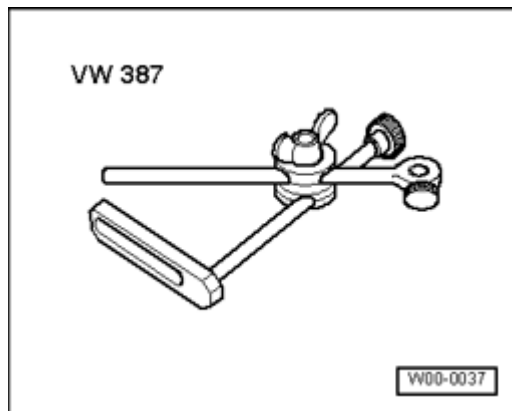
Identifying Universal Dial Gauge Bracket VW 387
